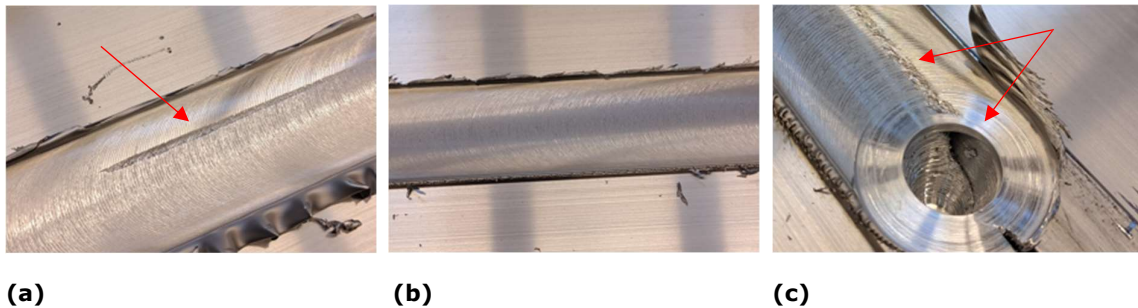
3_Gap_23mm weld showing (a) surface lack of fill defect at beginning of weld, (b) sound surface qualities in the middle, and (c) surface lack of fill defects and visible void on advancing side at the end of weld
